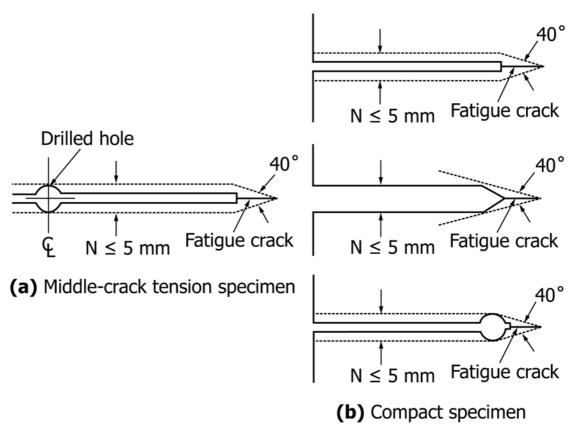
Envelope of Fatigue Crack Starter Notch Configurations
